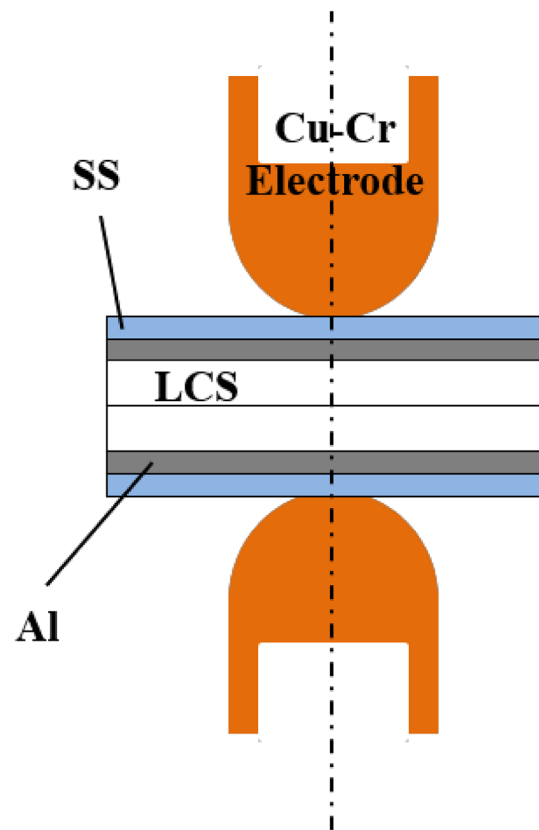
Schematic representation of resistance spot welding of the clad sheet with a low carbon steel–low carbon steel interface
